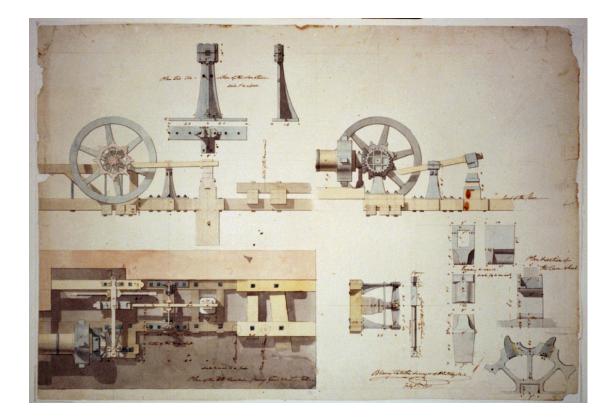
Benjamin Henry Latrobe, [steam engine, Washington Navy Yard, Washington, D.C., plan of the forge tilt hammer], September 29, 1808. Library of Congress, Prints and Photographs Division.
